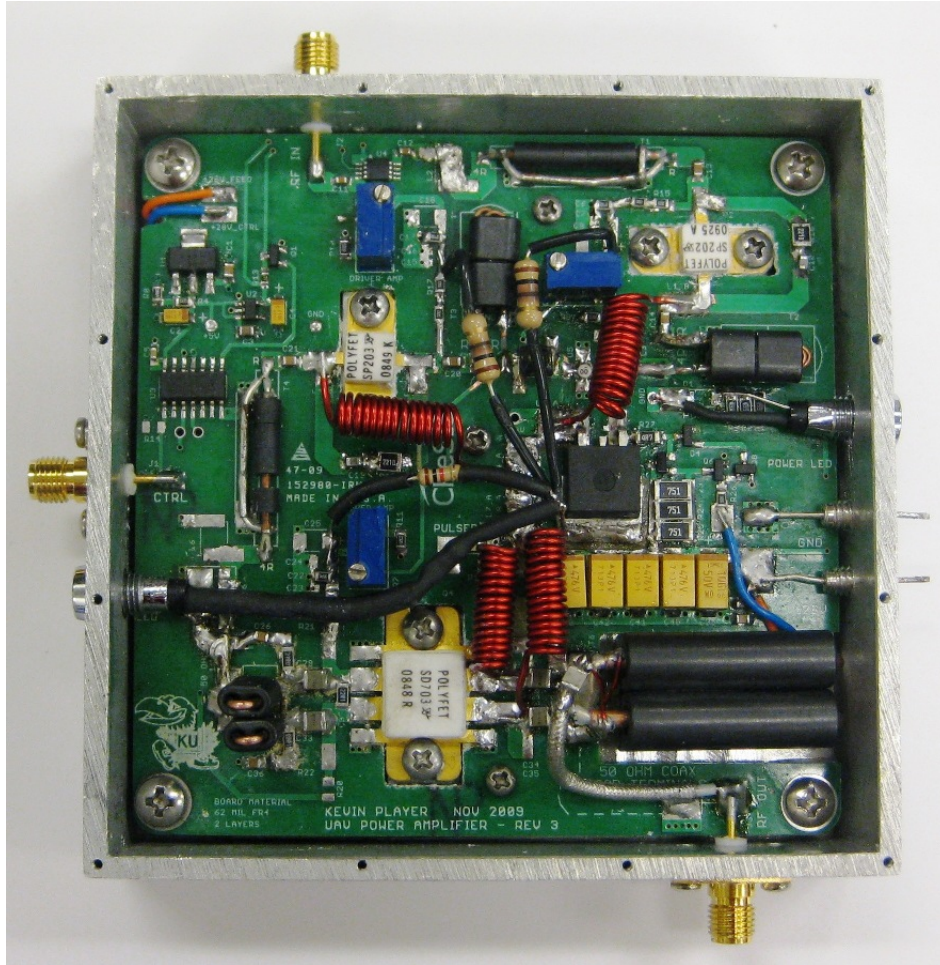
Final Prototype with Modifications in T/R Module Enclosure
